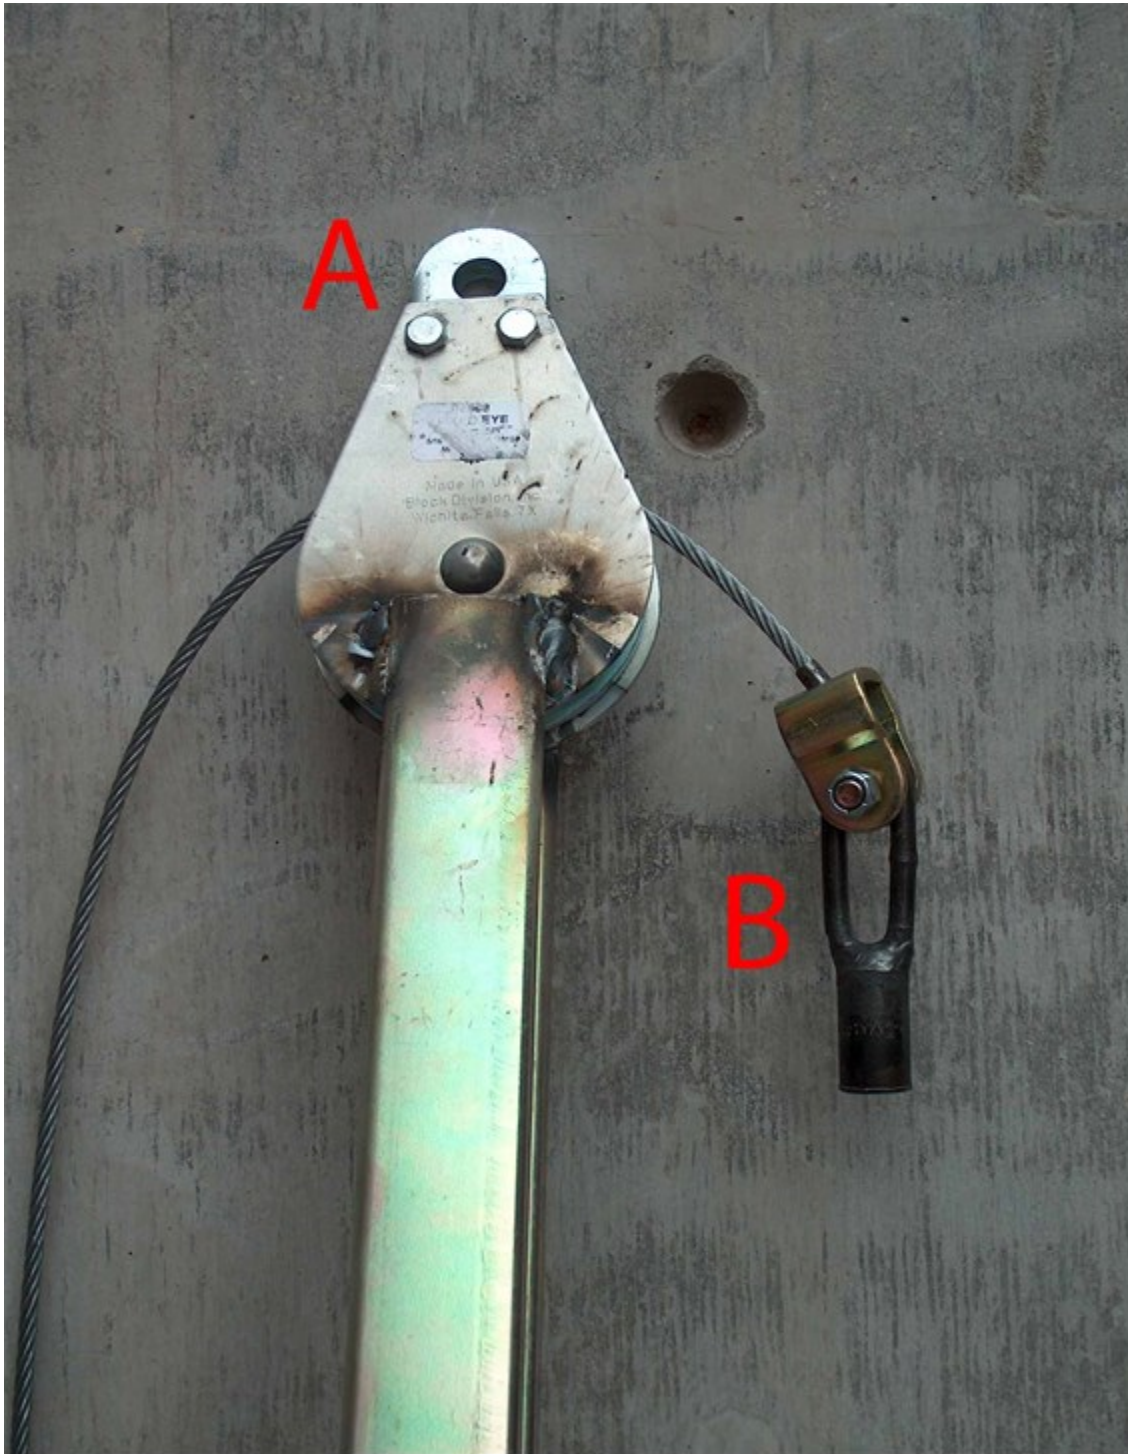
Pulley and pulling eye detail. The rivets for the pulley eye (A) have been replaced with bolts so that the steel plates of the eye can be removed to install the cable. B) pulling eye made from a chain link and a pipe coupling. Note a slot is cut in the unistrut to fit the pulley for attachment.
